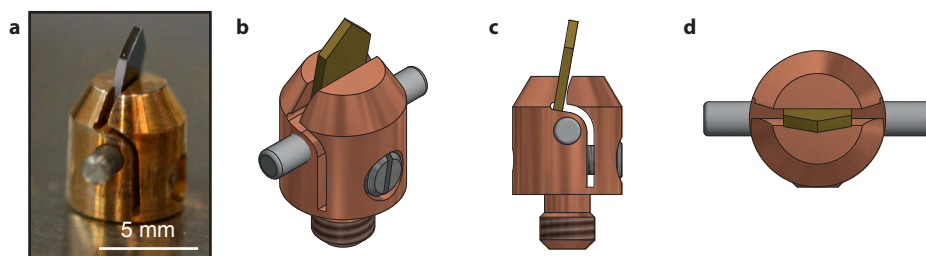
a Photograph of custom made smart tip holder for the (modified) Unisoku 1500 STM. b CAD render of the same holder. c Side view render that shows the clamp on the right fixed by a screw and shows the angle of the chip. The metallized top plane of the chip is on the left. d Top view render of the holder, here the metallized plane is on the top side.
